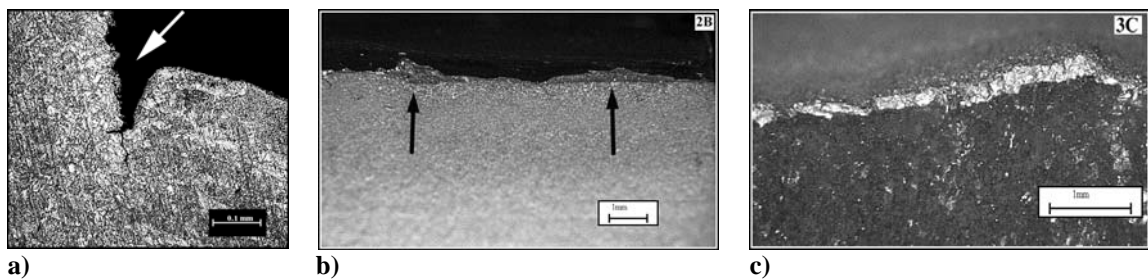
Microscopic investigation of fracture surface and weld defects: a) 0.3 mm initial cold lap; b) multiple cold laps along spatter band; c) a 0.1 mm straight-fronted surface crack.
